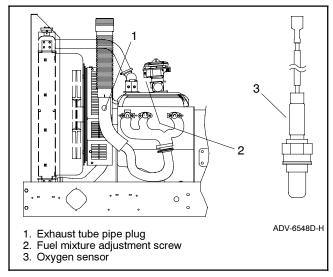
Oxygen Sensor Mounting Location, Typical (30 kW model shown)
